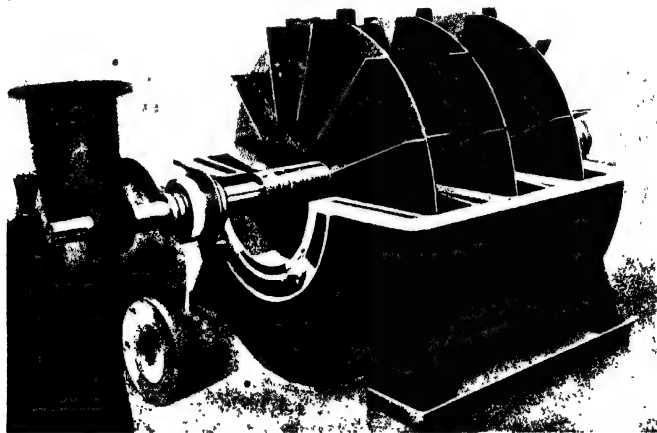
DEUTZ GAS WASHING FAN OR DISINTEGRATOR.
